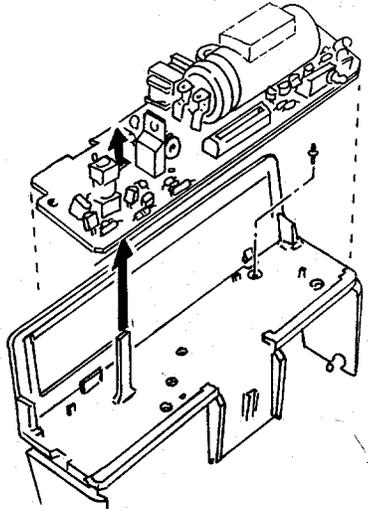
Removing PC Board & Flashtube Assembly & Plunger
